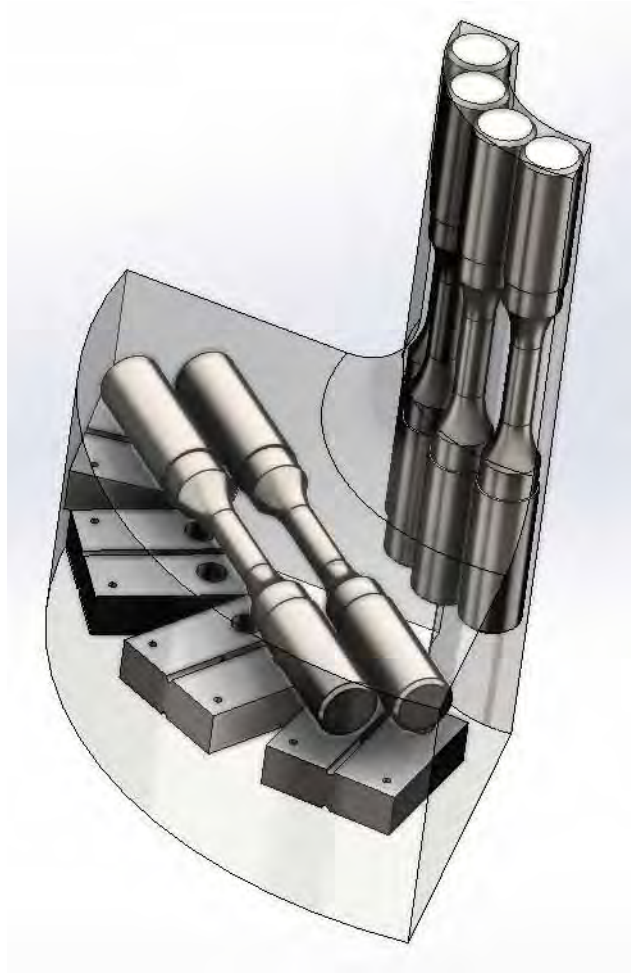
CGR/crack initiation and fatigue specimens were machined from the AM 316L flange produced by WEC and received from EPRI.
